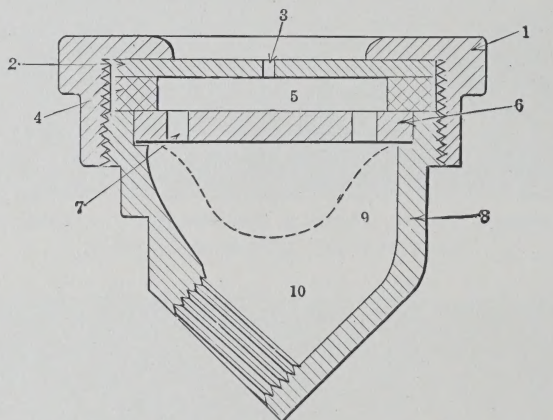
Sectional Drawing of an Angle Disk Nozzle.
